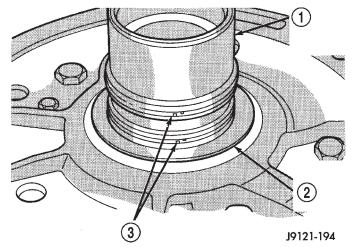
Reaction Shaft Support Seal Rings And Front Clutch Thrust Washer
